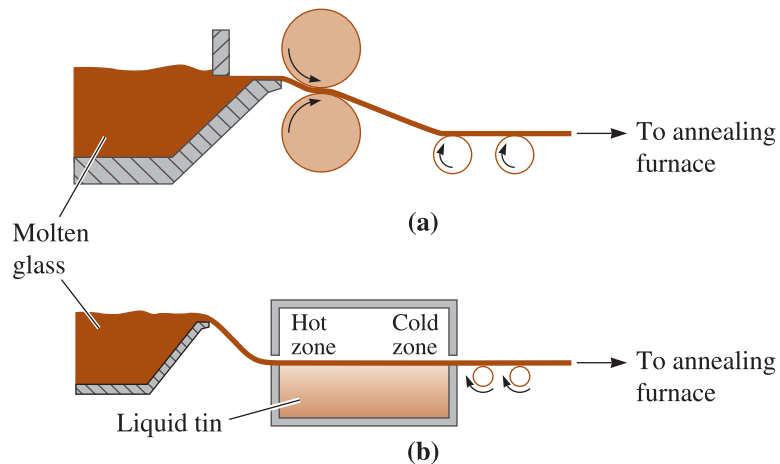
Techniques for manufacturing sheet and plate glass: (a) rolling and (b) floating the glass on molten tin.
